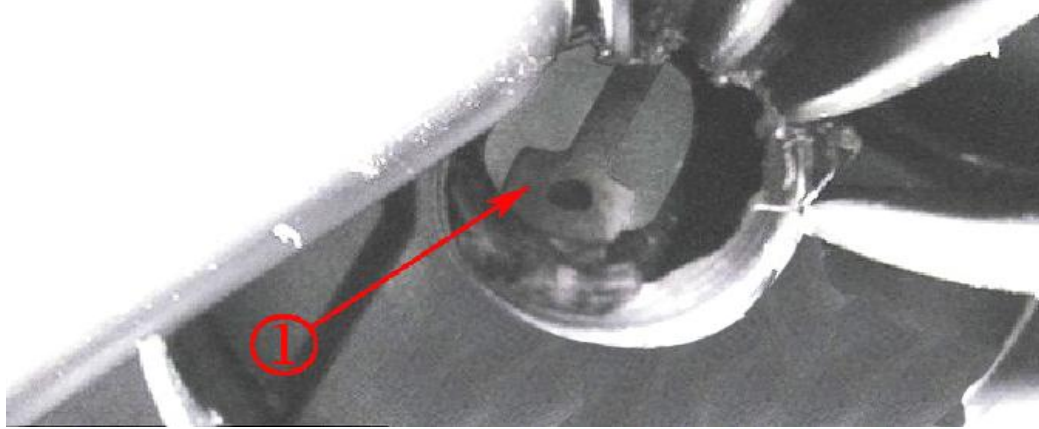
Passenger Side Enlarged Opening and Remaining End of Door Shaft
